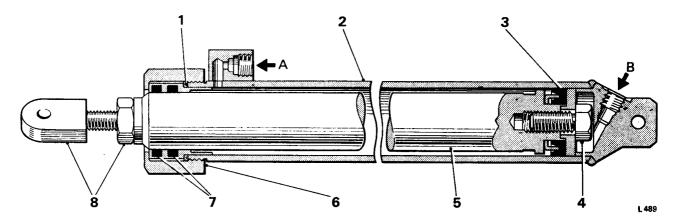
SECTIONAL VIEW OF A HYDRAULIC RAM
